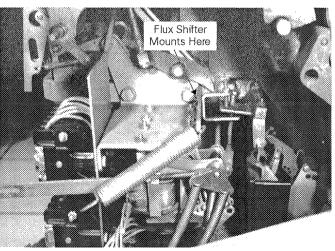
Breaker ready for installation of the fluxshifter assembly.
